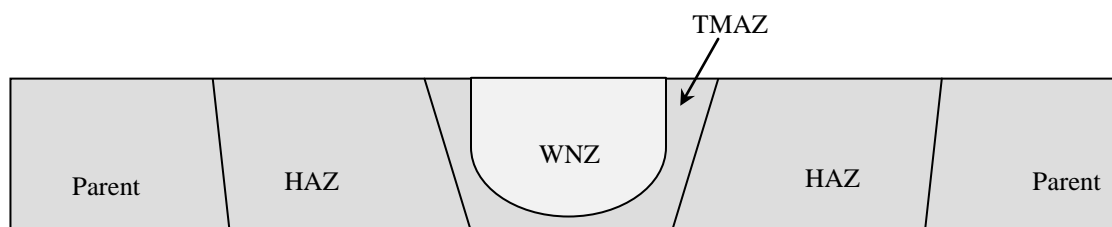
FSW process zones: Heat Affected Zone (HAZ), Thermomechanically Affected Zone (TMAZ) and Weld Nugget Zone (WNZ).
